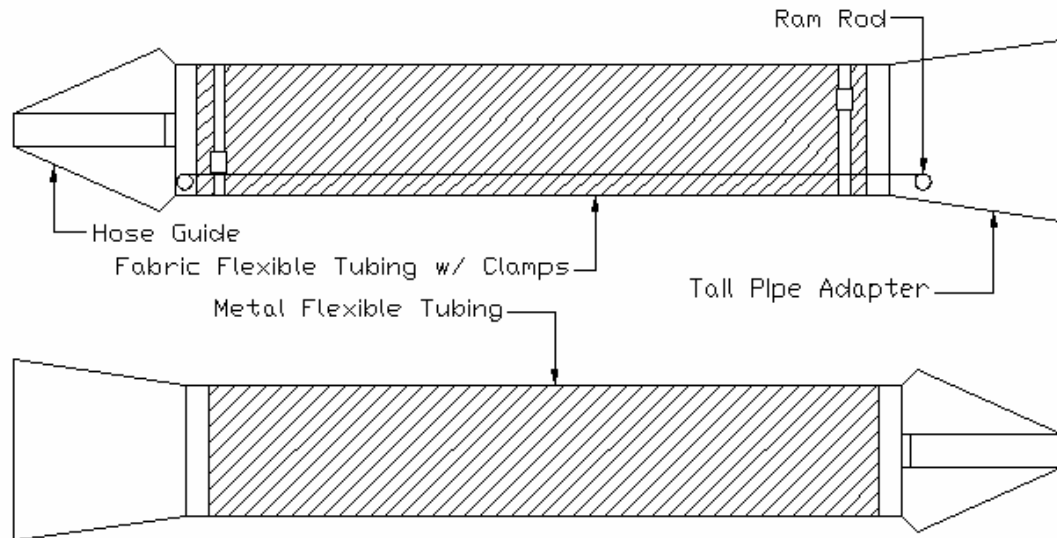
OVERHEAD DISAPPEARING TUBING ASSEMBLY LAYOUT
